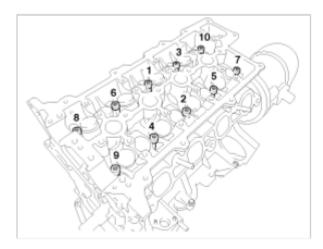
Identifying Cylinder Head Bolts Tightening Sequence Courtesy of HYUNDAI MOTOR AMERICA
